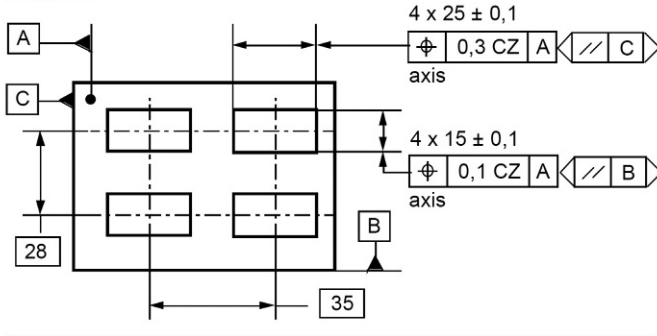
Position tolerance zones of axes with perpendicular cross sections
